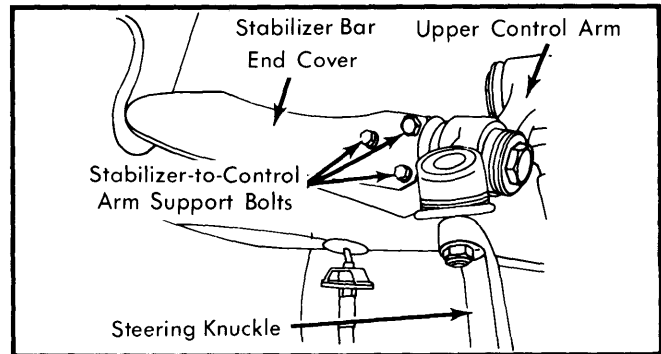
Showing Attachment of Upper Control Arm and Stabilizer Bar
